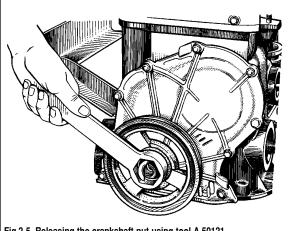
Releasing the crankshaft nut using tool A.50121
